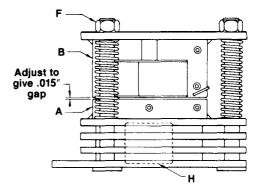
MOTOR BRAKE ADJUSTMENT
